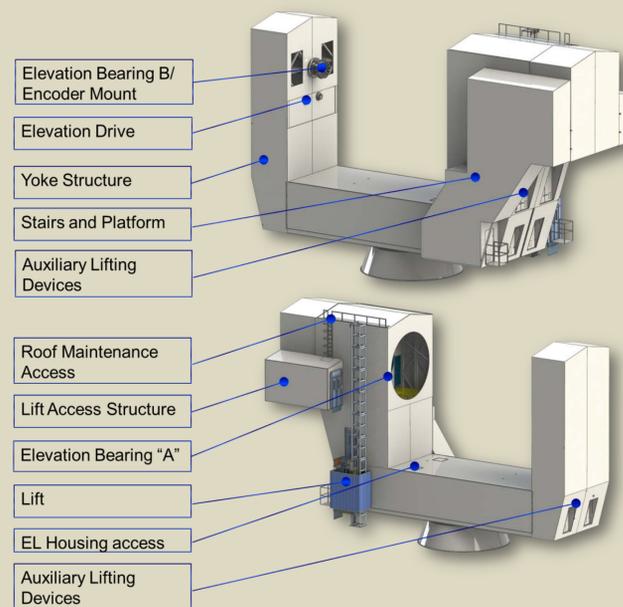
Two views of the yoke structure and support cone, both insulated steel framework assemblies. Elevation drives are opposite the focal panel. A lift is provided to move personnel and small equipment between floors.
